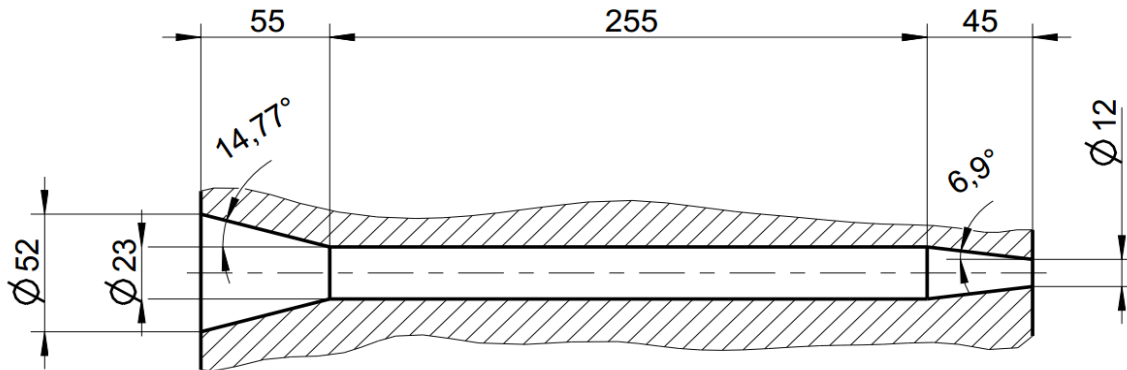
Drawing of confusor and the cross-section of nozzle (Source: authors' compilation and [5])
